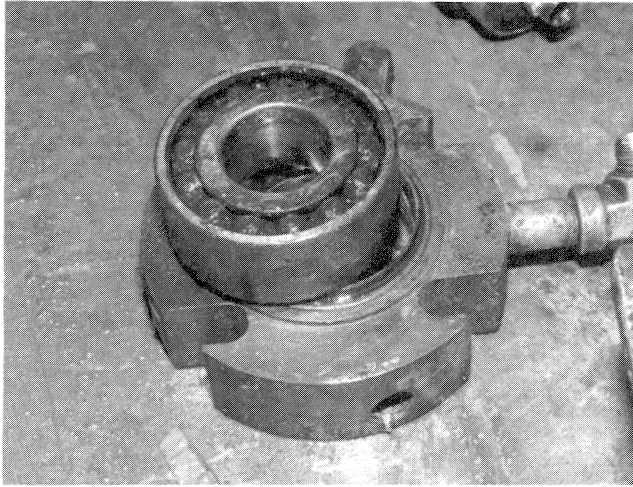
Double-Row Thrust Bearing Showing Adequate Lubrication at Time of Pump Failure.
